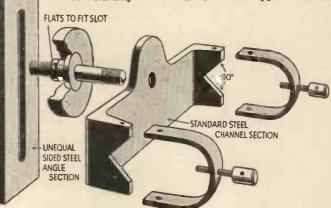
Constructional details of the holder, showing how the various parts are put together.
